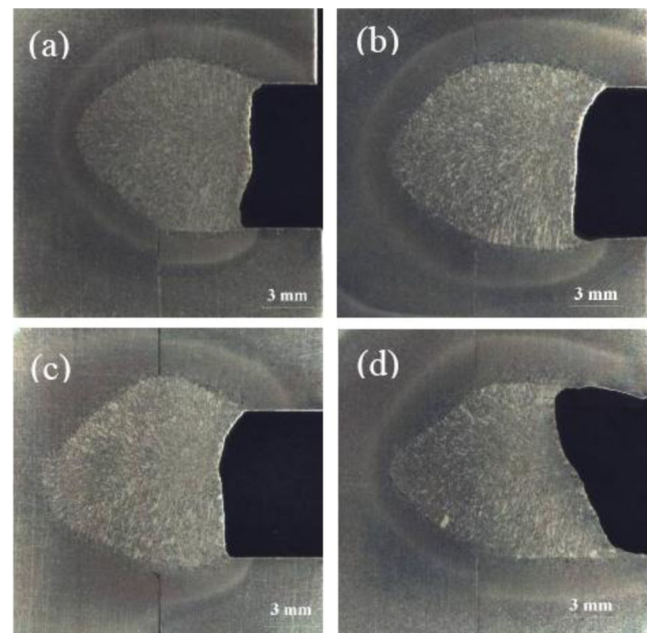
Cross-sections of weld with different arc voltage: a 26 V; b 27 V; c 28 V; d 29 V [16]
